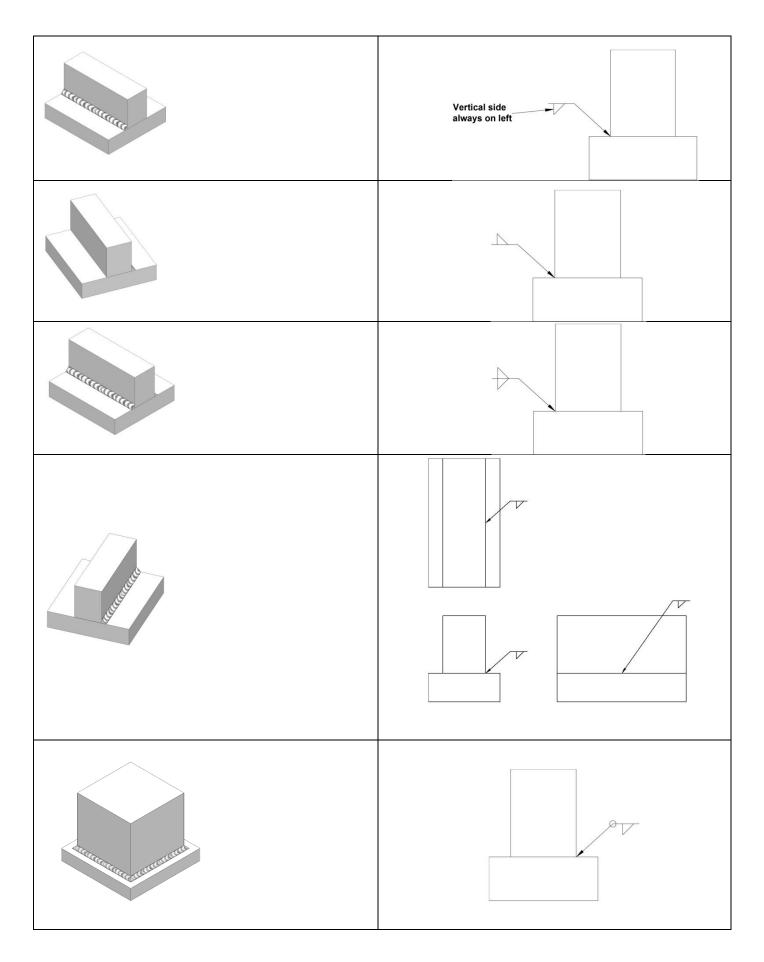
| EXAMPLES OF WELDING SYMBOLS
